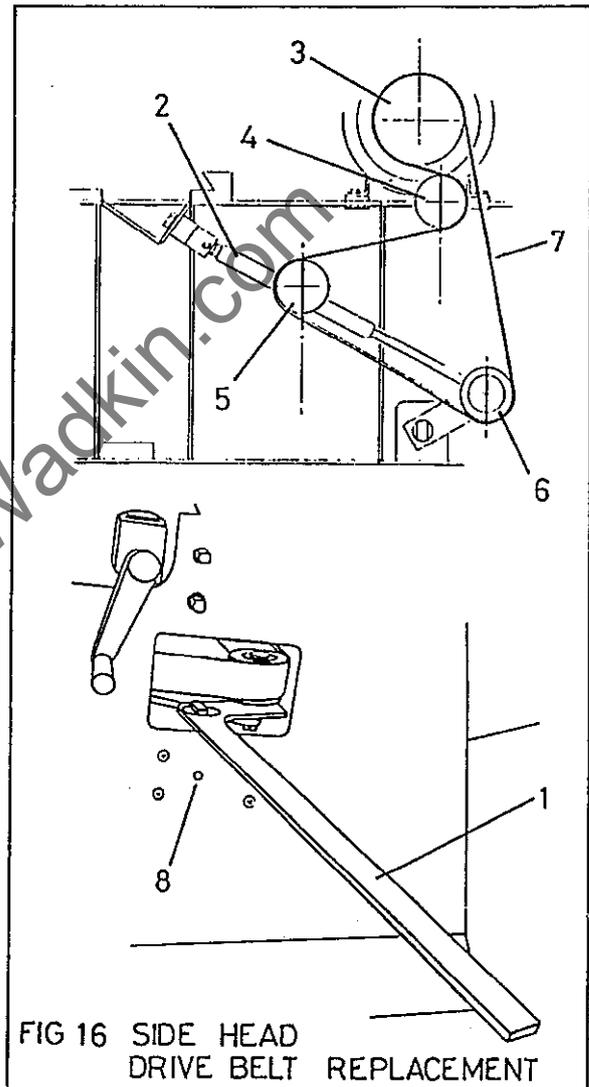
SIDE HEAD DRIVE BELT REPLACEMENT
